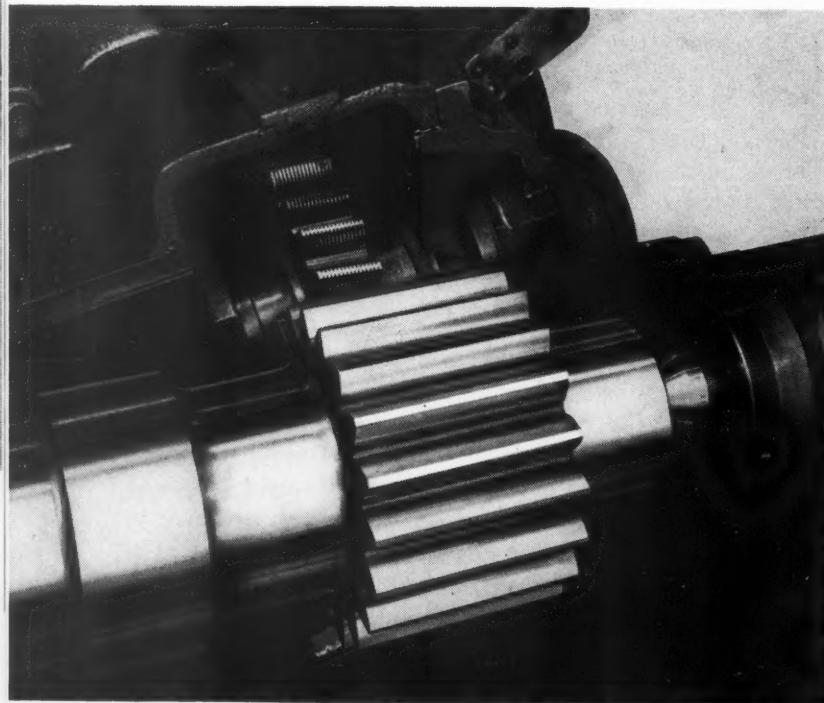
A 3 diametral pitch pinion for a locomotive motor being finish-cut by a gear shaving tool
